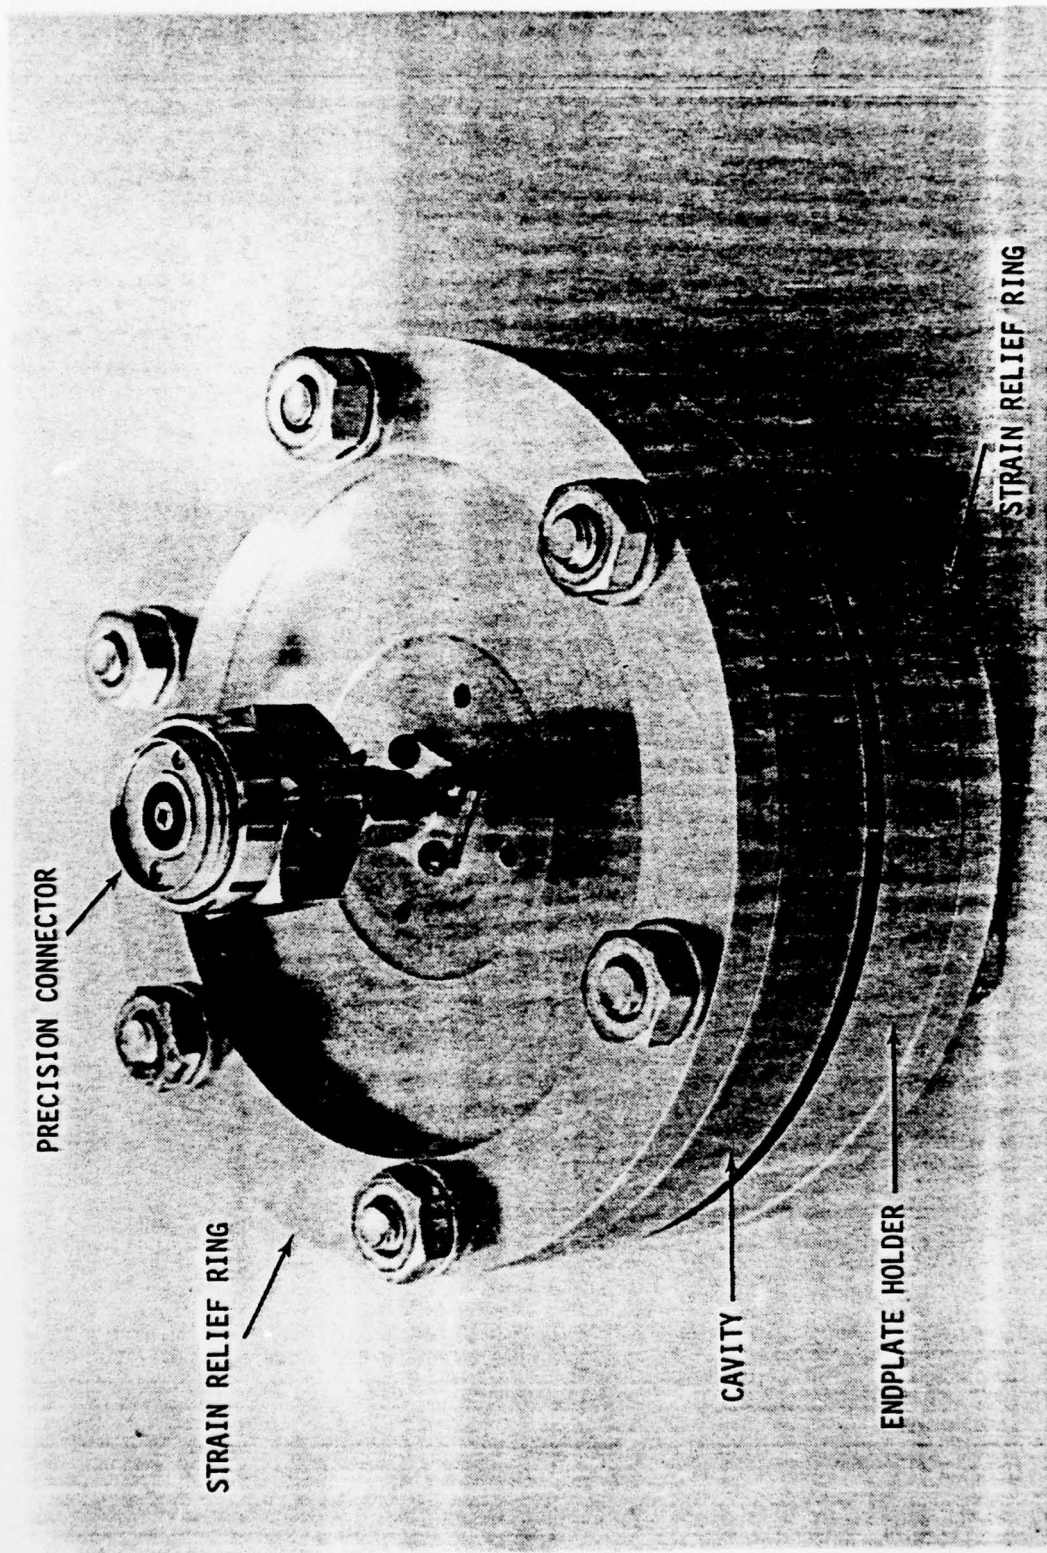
C. PHOTOGRAPH OF ASSEMBLED CAVITY
